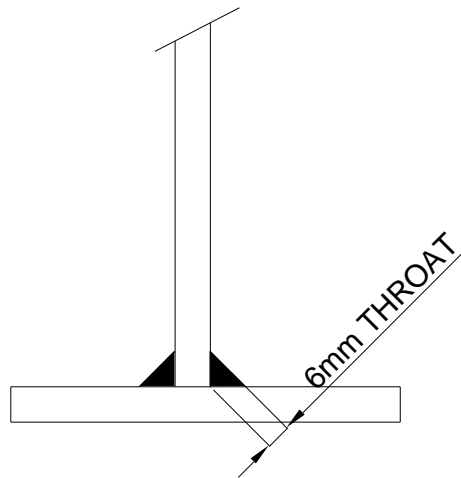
Throat Dimensions of a Typical Fillet Weld
